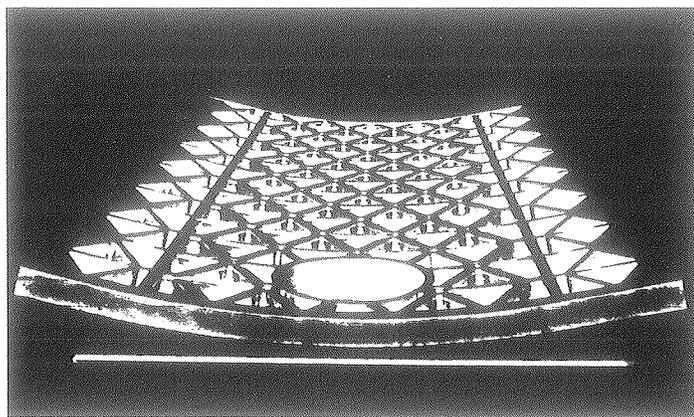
Isogrid test panel. The narrow longitudinal bands of unmachined material represent the location of the panel-to-panel welds.
